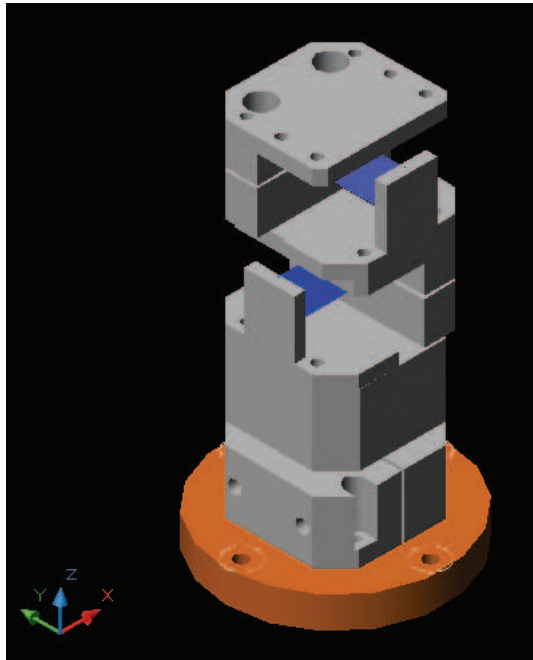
3-dimensional CAD view of 3-axis positioner.
